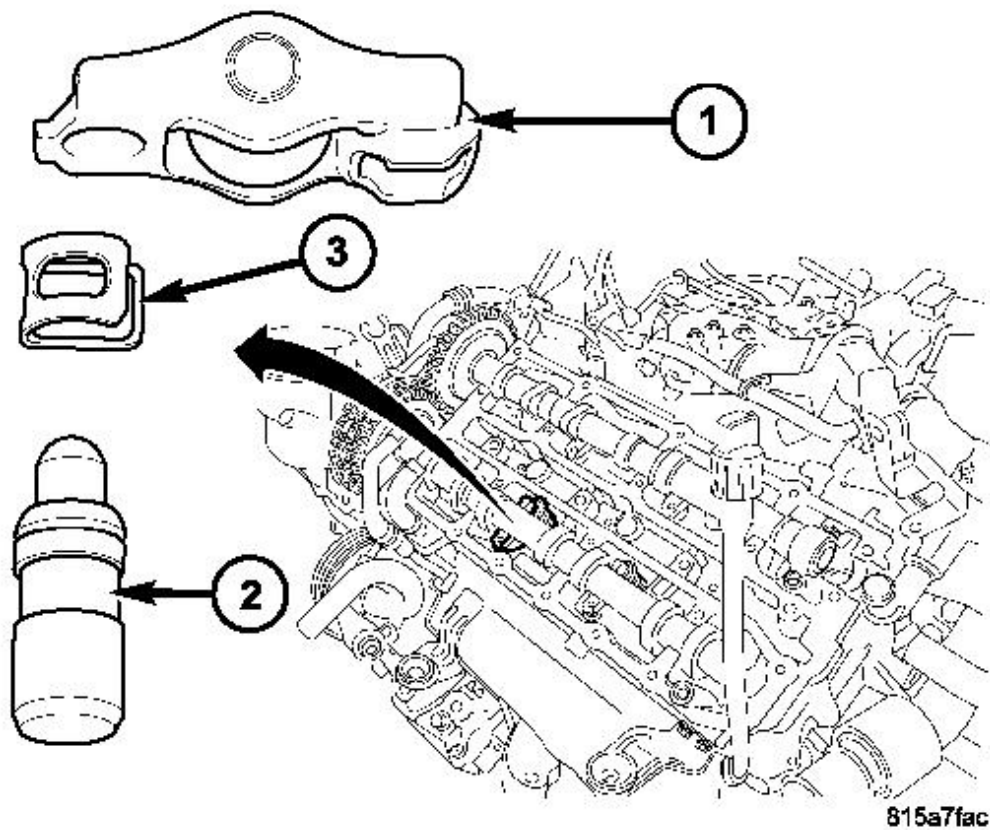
Rocker Arm, Hydraulic Lifter & Retaining Clip
